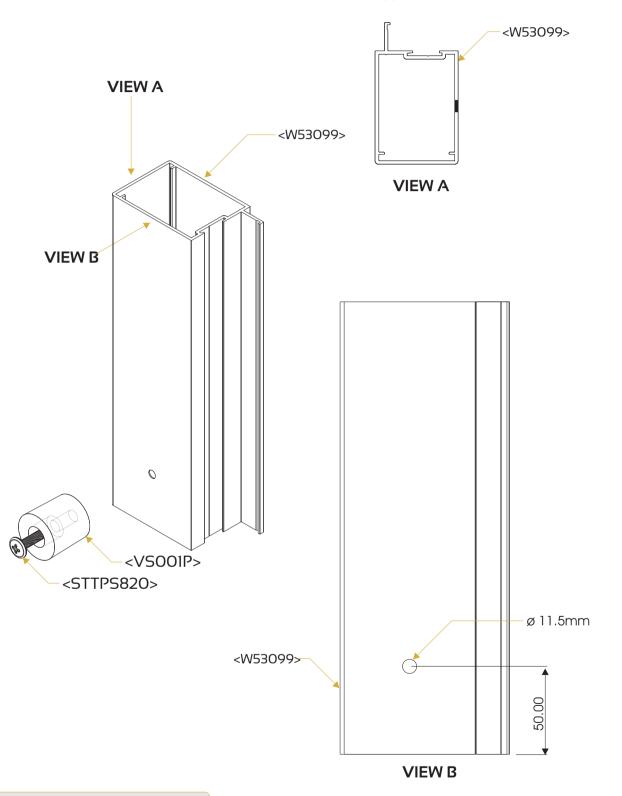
DETAIL TYPICAL TO HEAD AND SILL OF FIXED AND SLIDING LIGHTS
